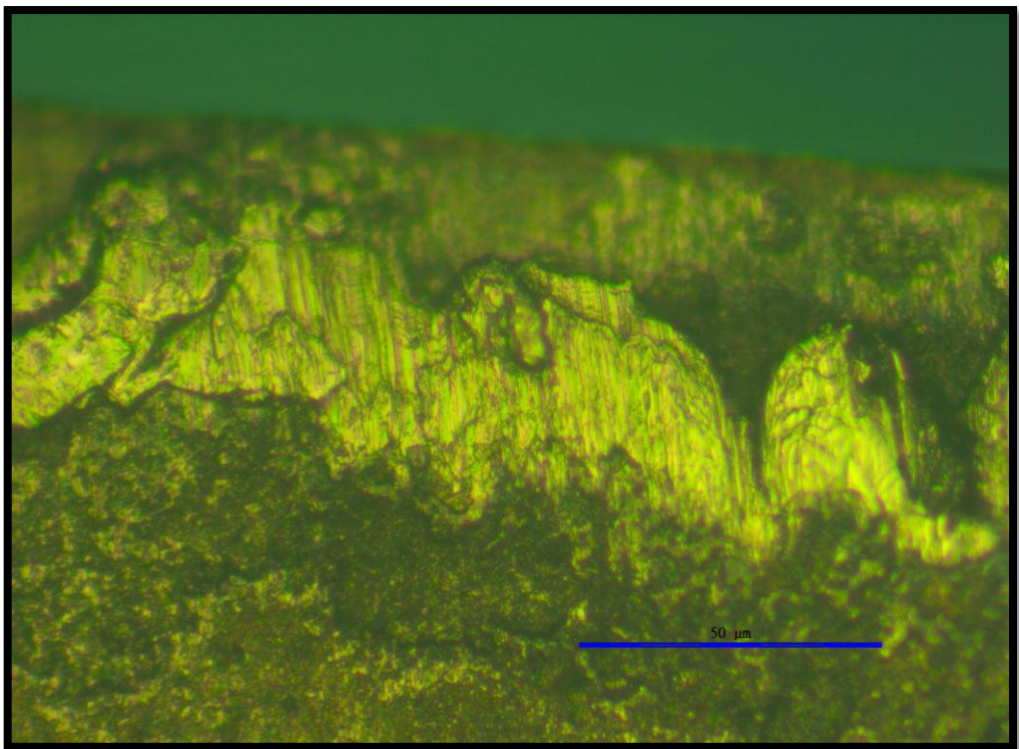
Flank wear at experiment (100 m/min, 0.1mm/rev, 0.1mm/tooth)
